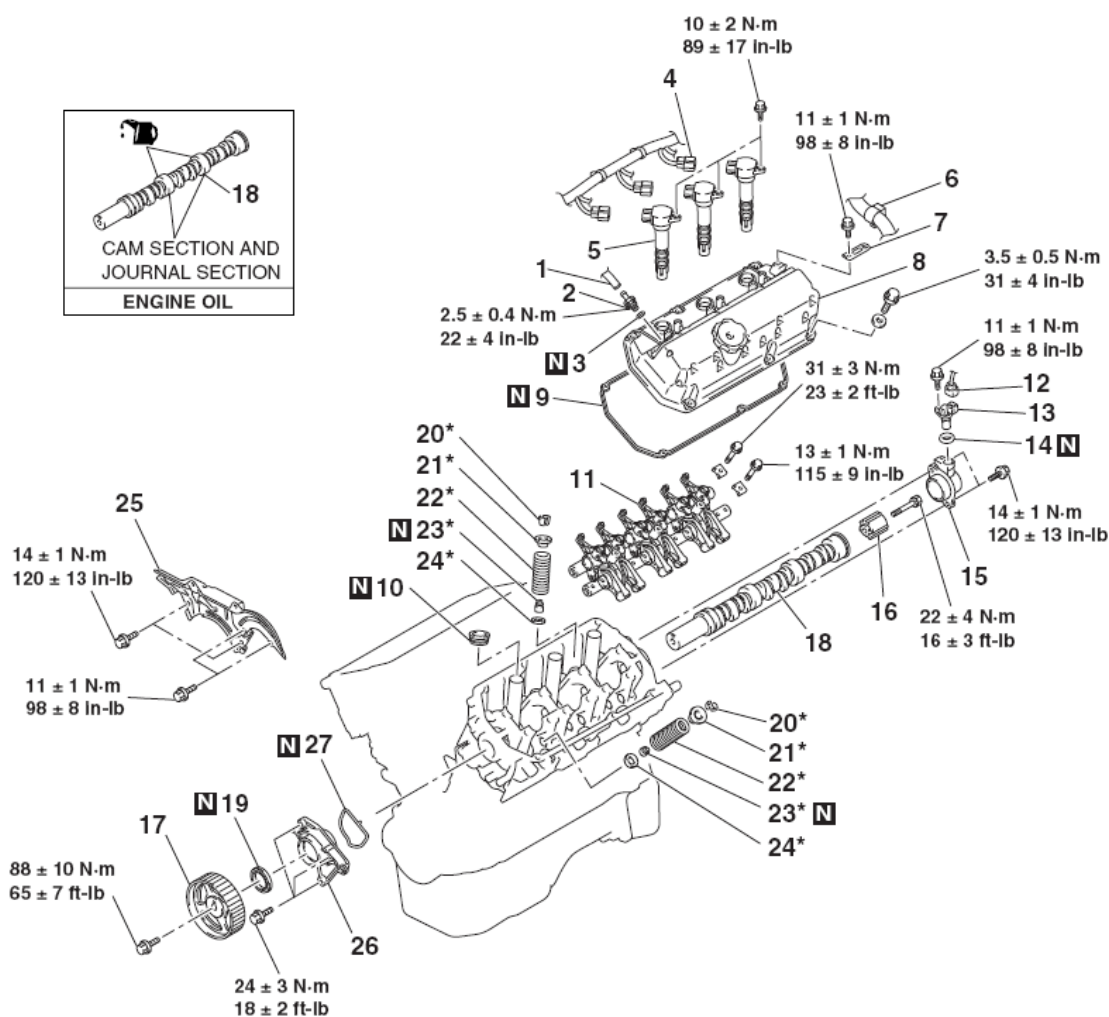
Removing Camshaft And Camshaft Sprocket Assembly (Exhaust Side)
